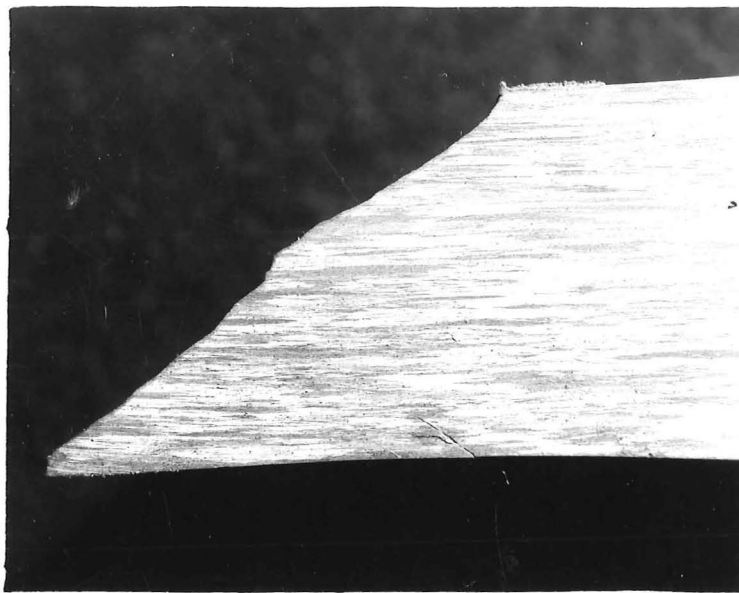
/2: A close-up photograph of an air fatigue crack, showing both tensile and shear mode systems.
